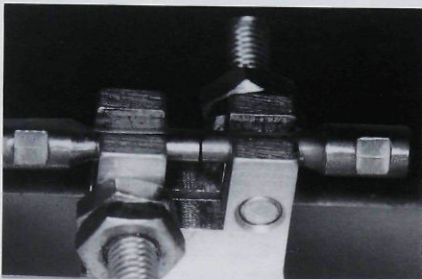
Aluminum jig with casting parts aligned and 0.005-inch gap set.
